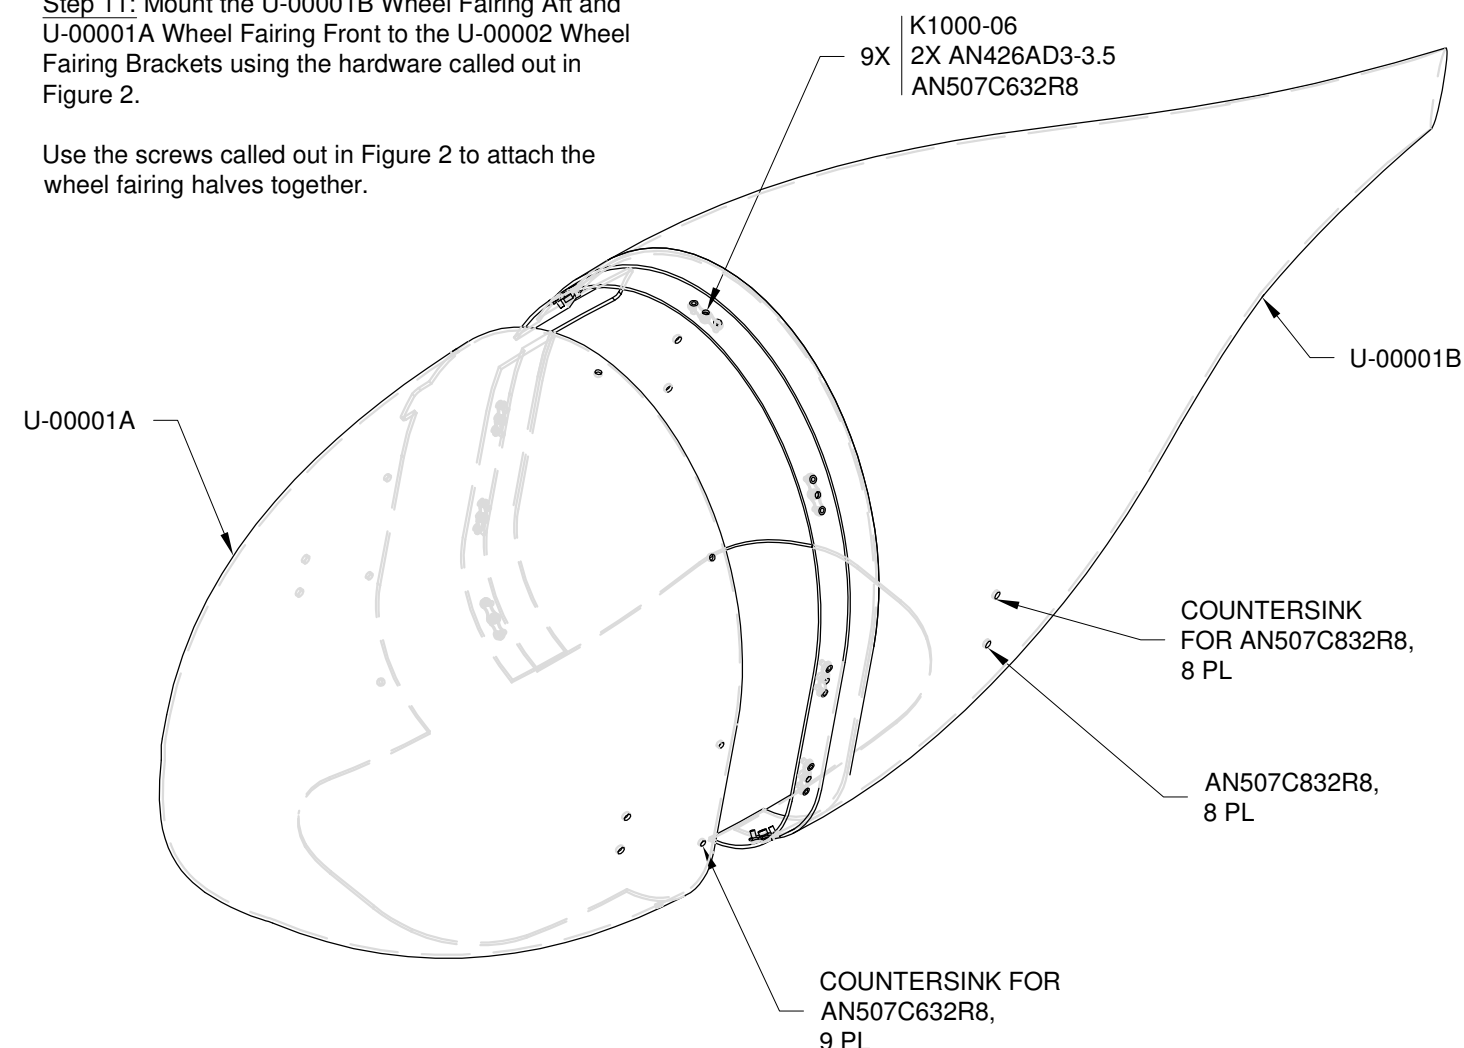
ATTACH WHEEL FAIRINGS TO EACH OTHER
